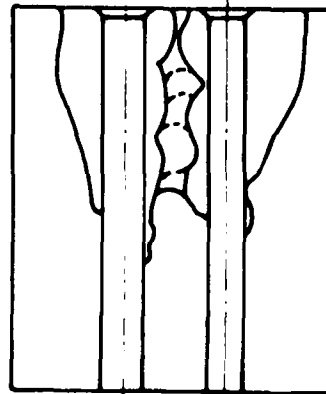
(i) FRACTURES TYPE (ai) SPECIMENS. DRILLED 3.3 mm, FILLED 0.125 in. RIVETS
